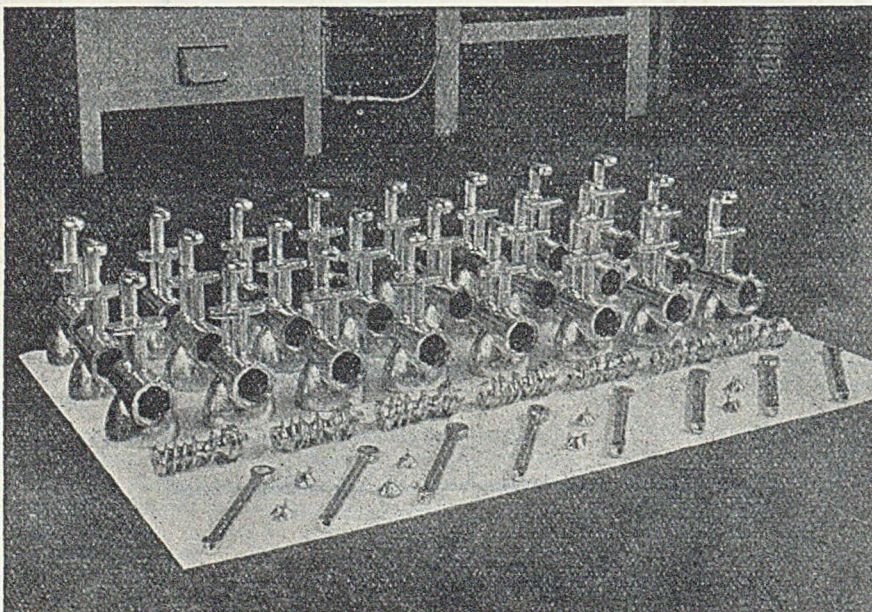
Cast-iron Mincing Machine Parts Tinned by the T.R.I. Chloride Method.
